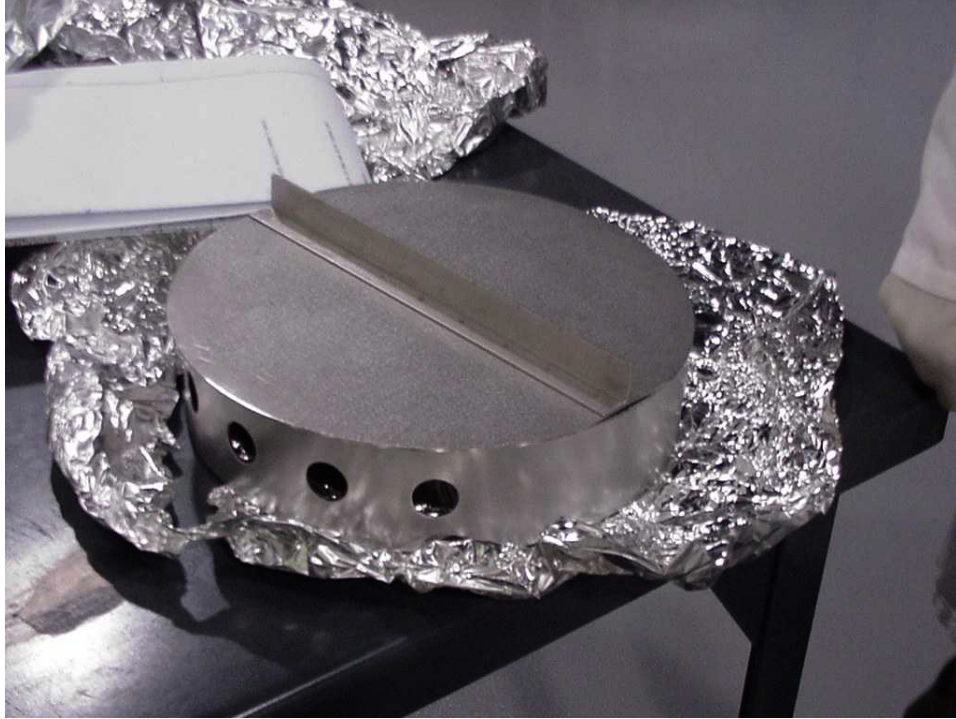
Sheet metal baffle used to shield braze assembly #2-5.
